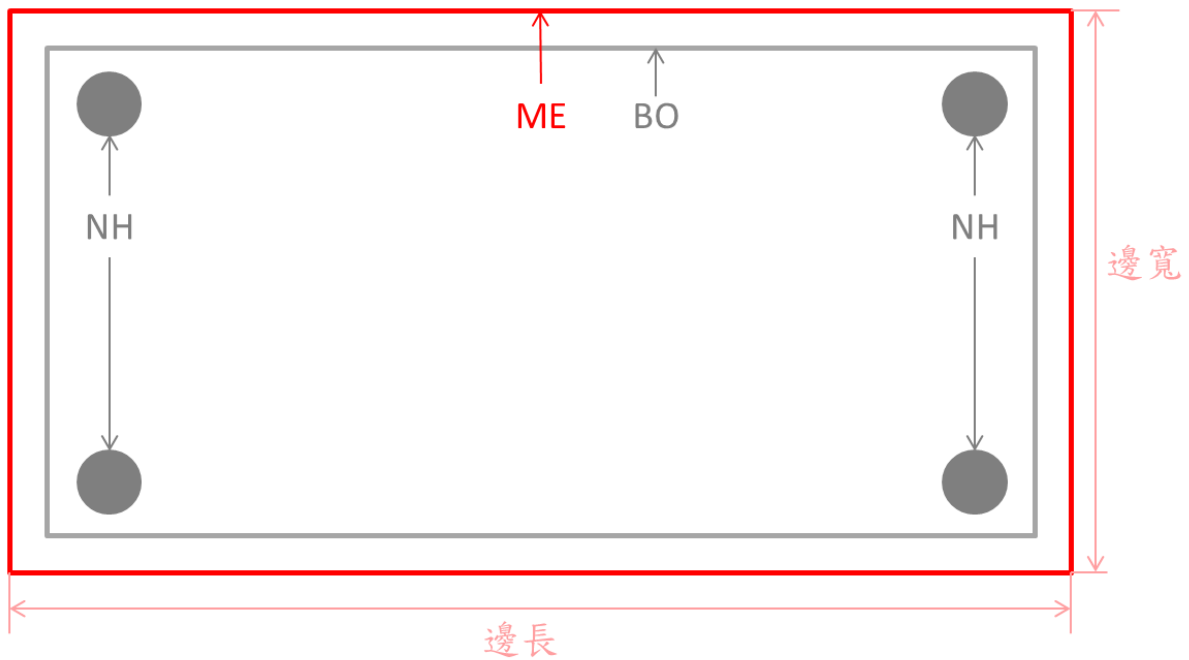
PCB ME Frame ME and Board Outline BO frame
